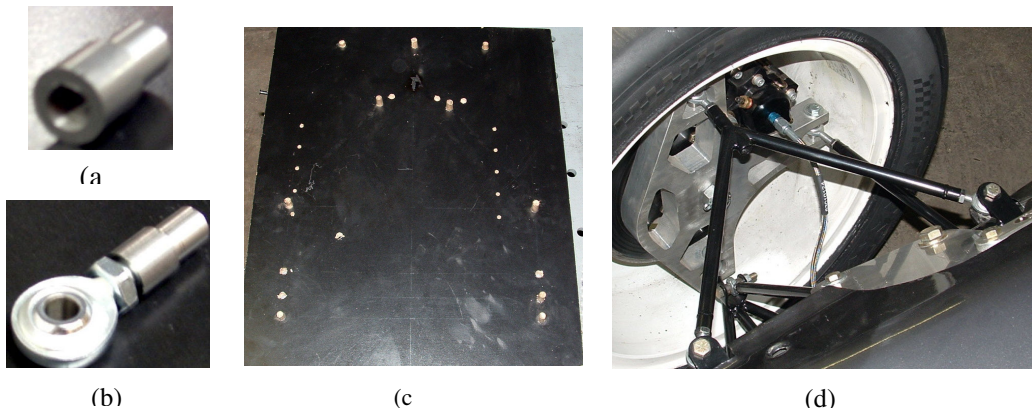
Lower A-arm Machining and Assembling into Chassis, (a) Part stock (b) machined arm cap (c) assembly fixture (d) A-arm in the chassis
